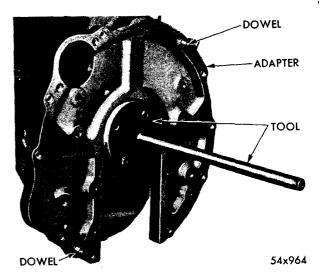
Tool C-870 Installed to Crankshaft Flange
